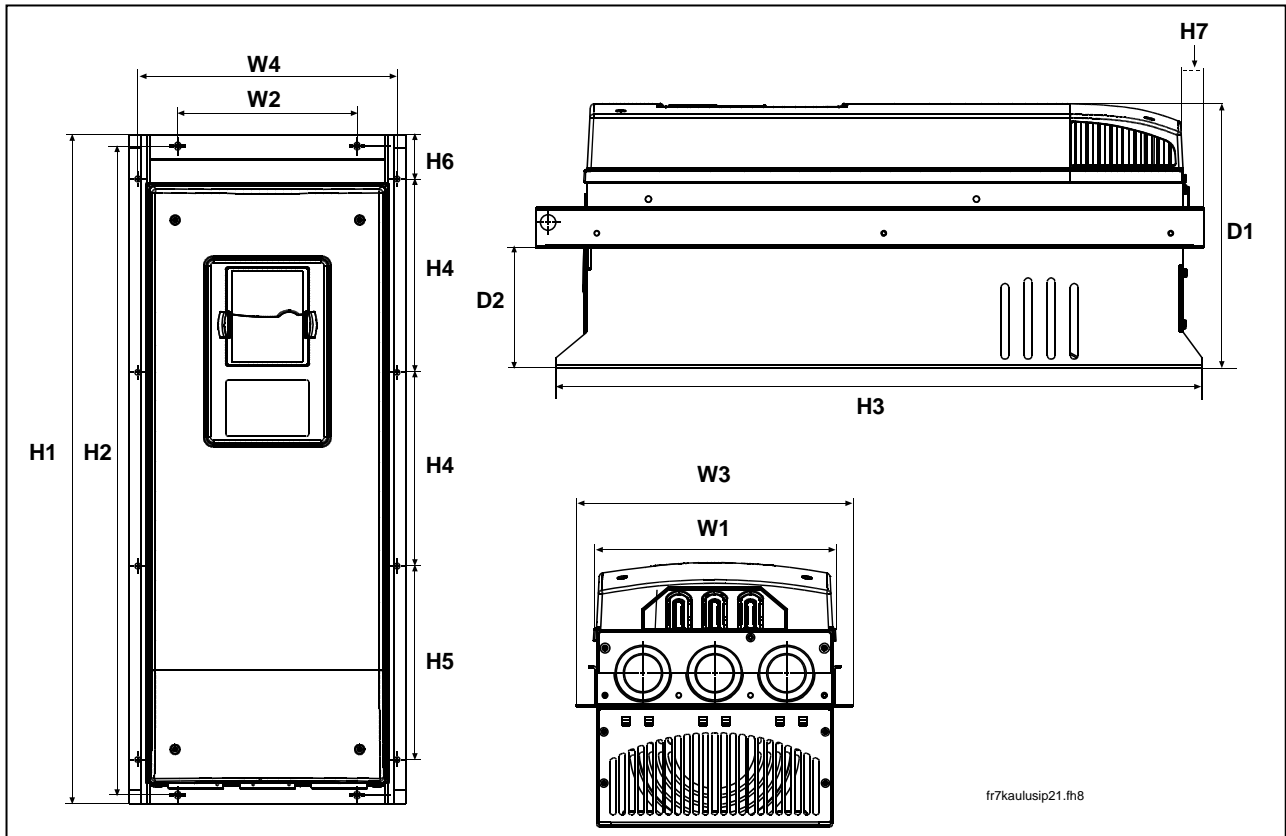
ACCEL500 Inverter Dimensions, IP21 with Flange, FR4 and FR6
